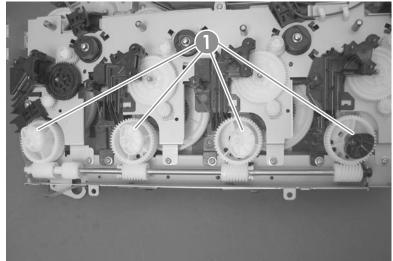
Reinstall the main-drive assembly (4 of 7)
